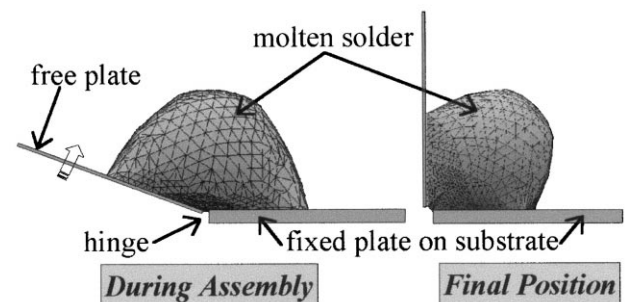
Illustration of solder self-assembly of a hinged plate.
